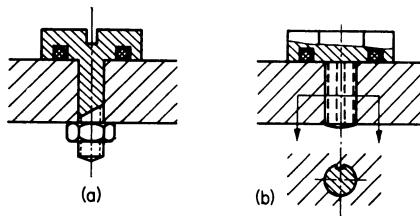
Screws, sealed with O-rings in rectangular grooves: (a) bolt and nut; (b) screw with slot to evacuate the threads
